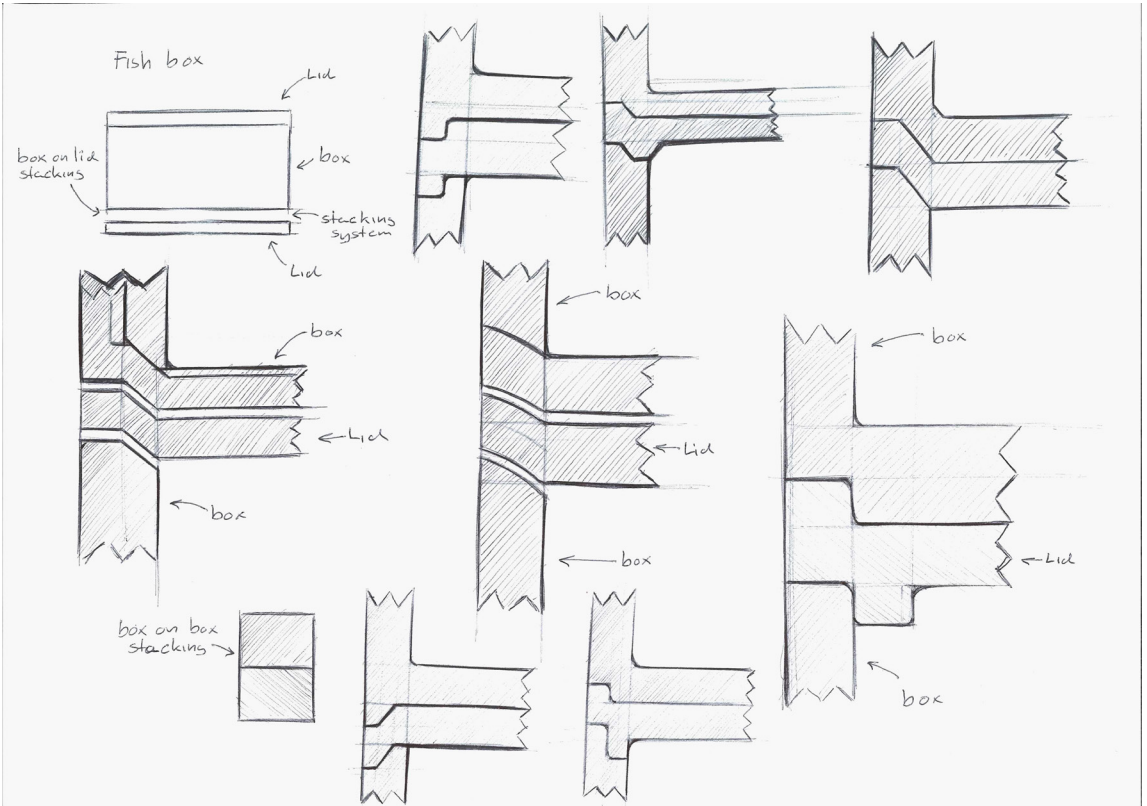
DRAWING SHEET 2- STACKING SYSTEM
